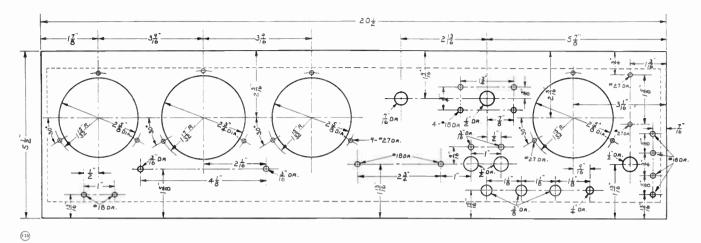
Suggested Layout for Voltmeter Panel. Clips for a fuse are mounted on the front of the panel, at right side of the thermo-galvanometer.
